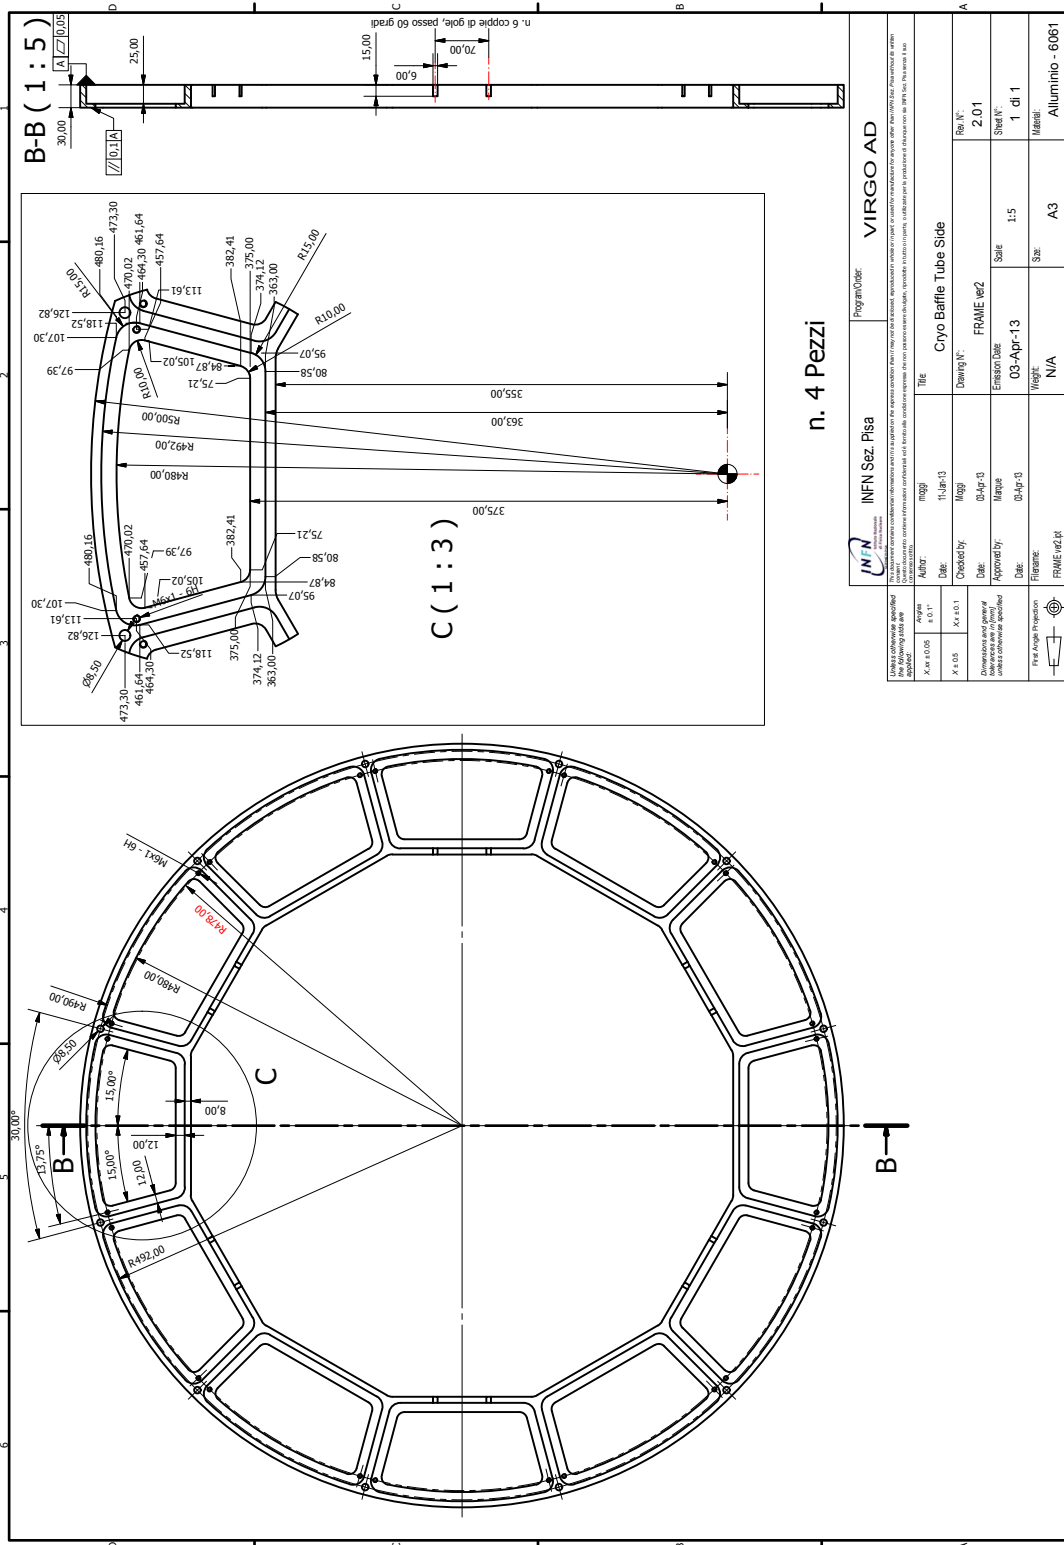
Technical drawing for the frame of the Baf_Cryo.
